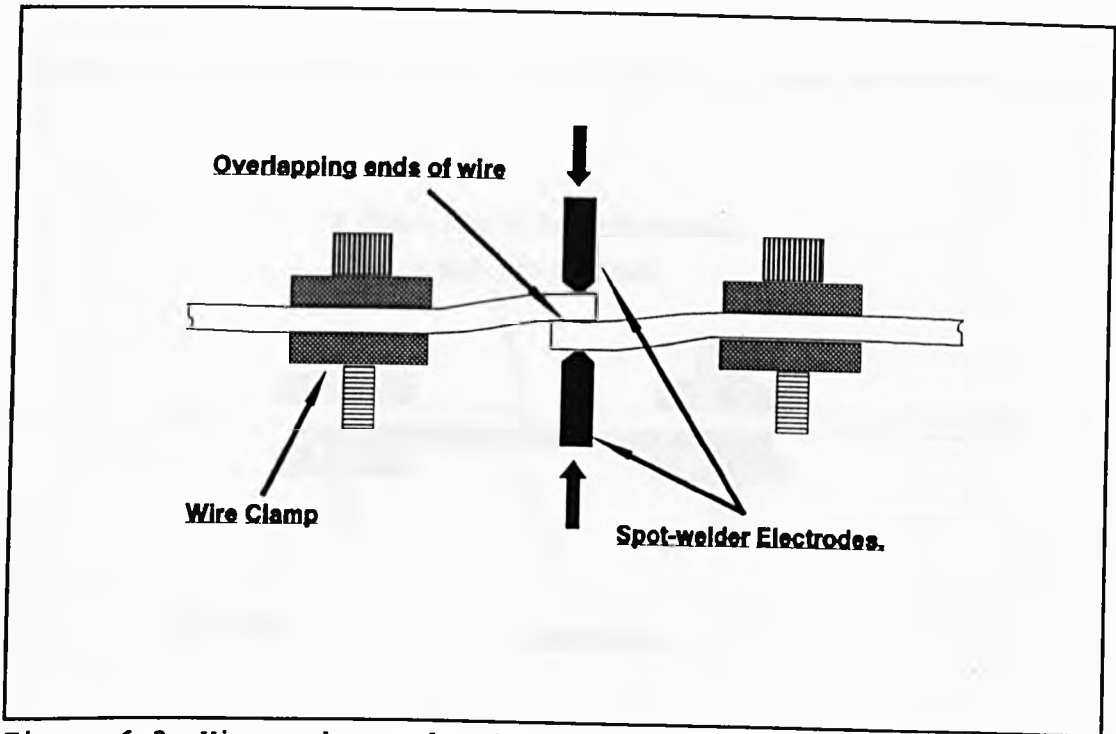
Wire ends overlapping for spot welding.
